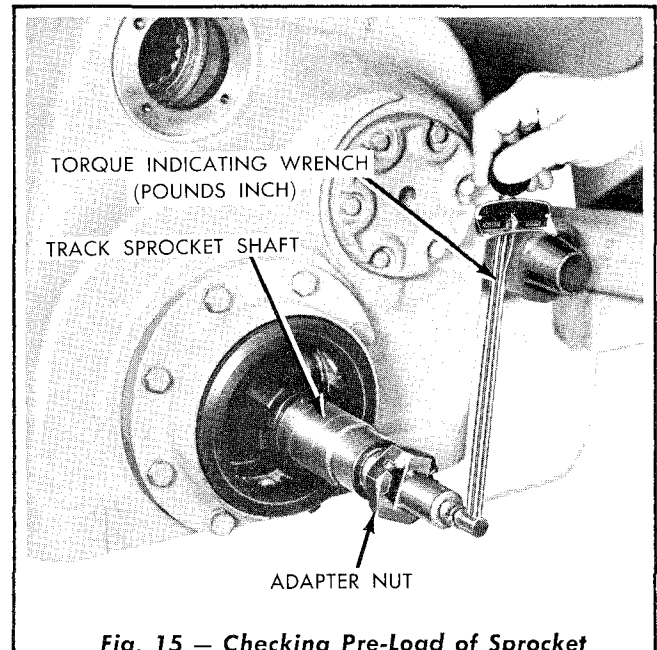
Checking Pre-Load of Sprocket Shaft Bearings
